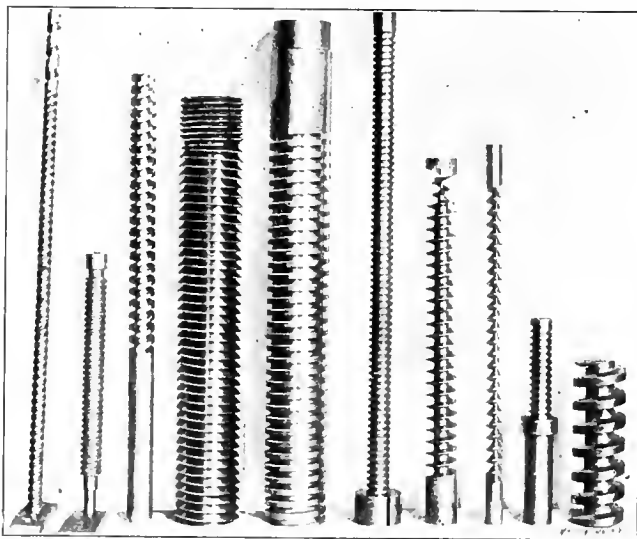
Examples of Screws cut by the Method Developed by the Screw Cutting Co. of America.
